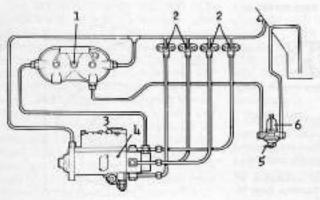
View showing four cylinder engine fuel system. Three cylinder engine system is similar.
